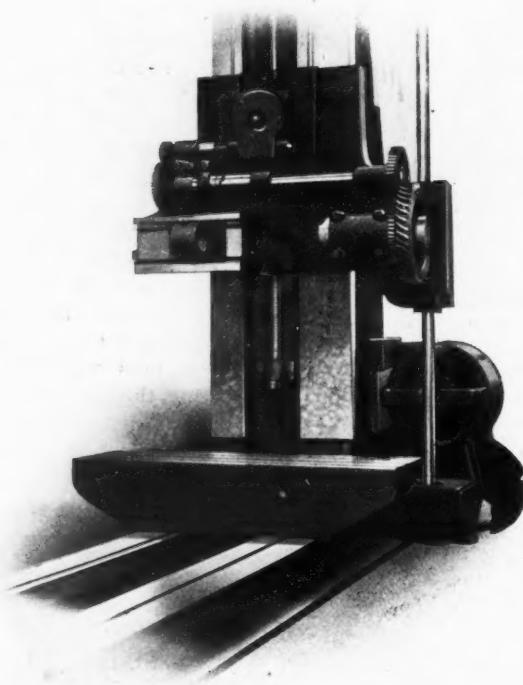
Detail showing Drive to Spindle and Feed Mechanism
